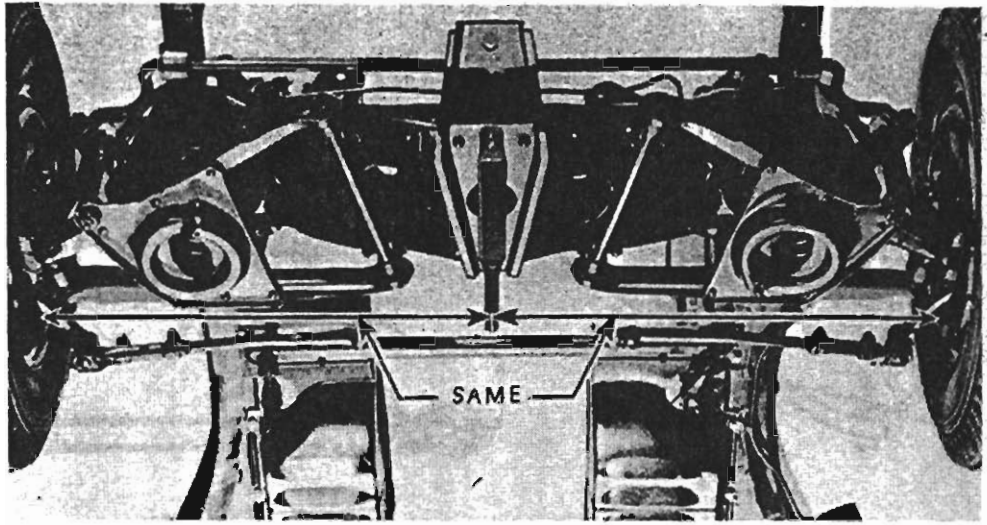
Measure from the Mark on the Arm of the Gauge to Each Front Wheel Brake Support Plate.
